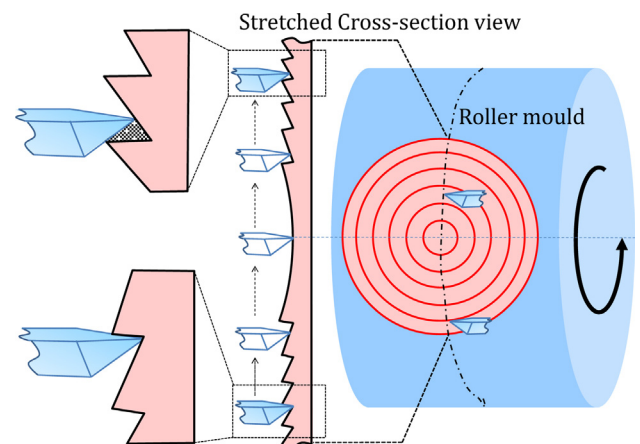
Incapability to machine radial Fresnel lens on a roller using ultra-precision diamond turning method.
